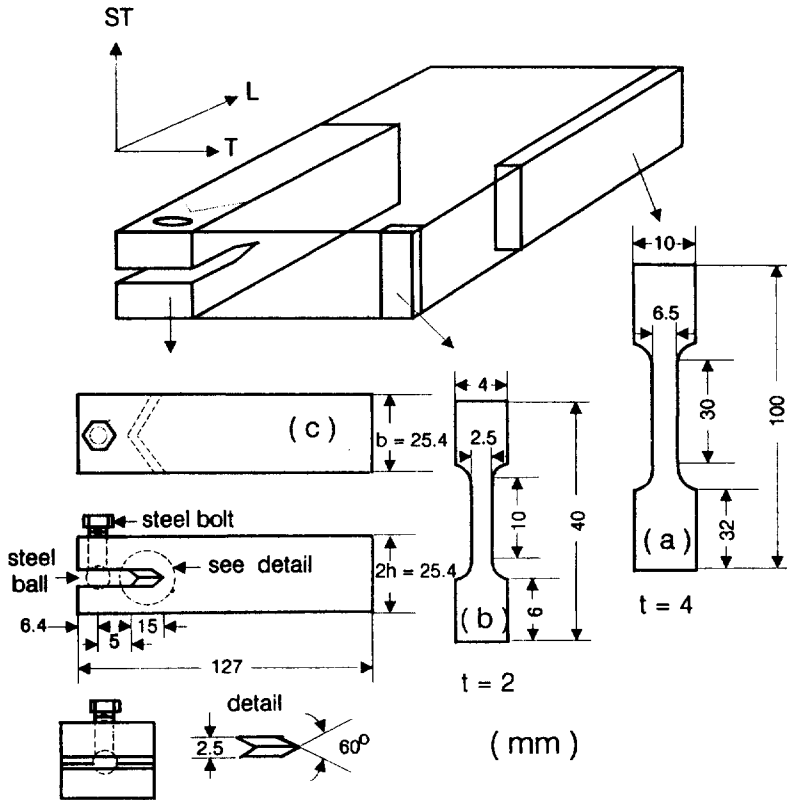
Schematic geometry of test specimens : (a), ASTM sub-size tensile test specimen(L-S type) ; (b), ASTM sub-size tensile test specimen(S-T type) ; (c), double-cantilever beam (DCB) specimen.
